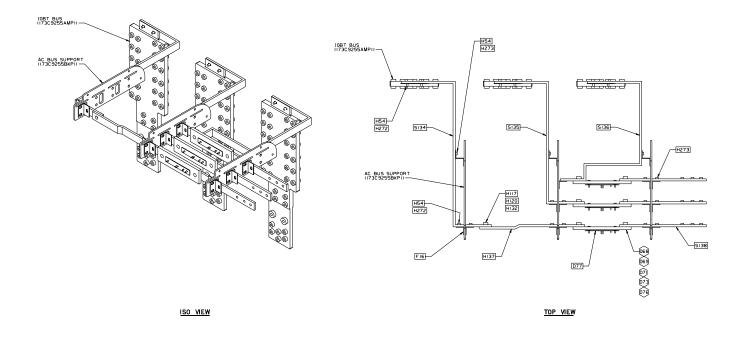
Back Panel Assembly Showing IGBT Bus, Load Cabinet
